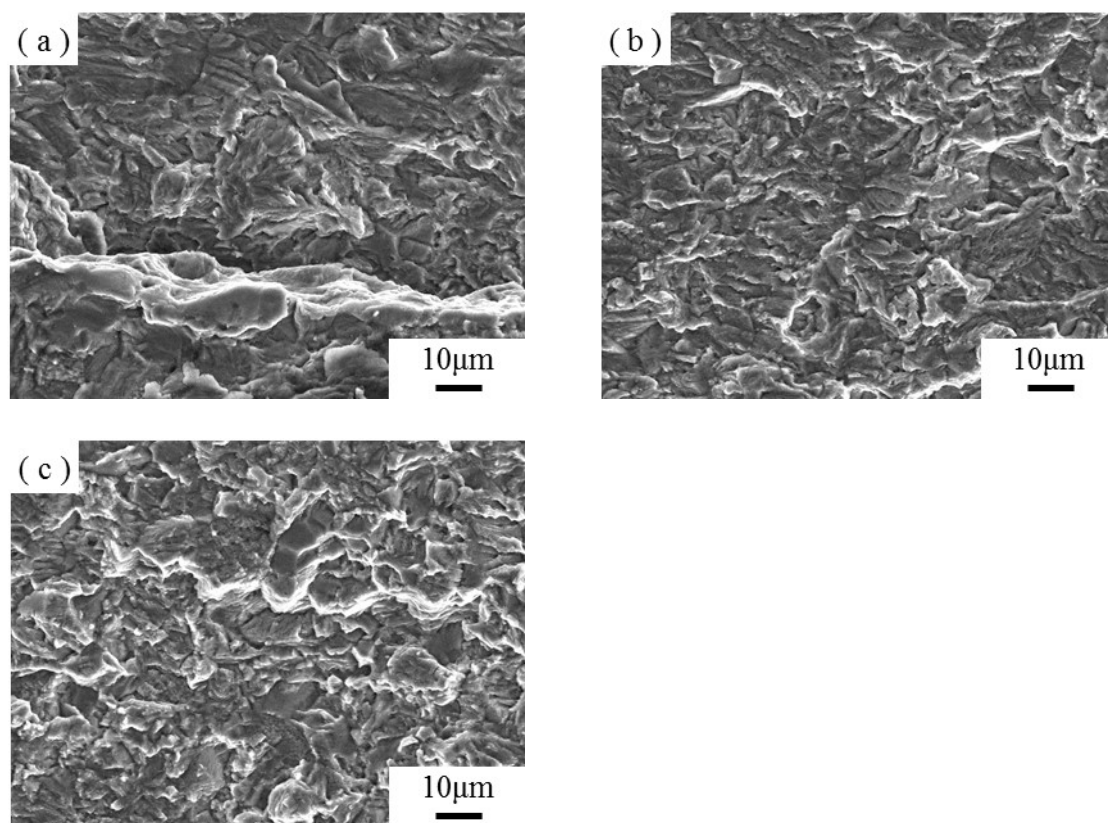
Fracture surface at steel side of Asweld after FCP test.
